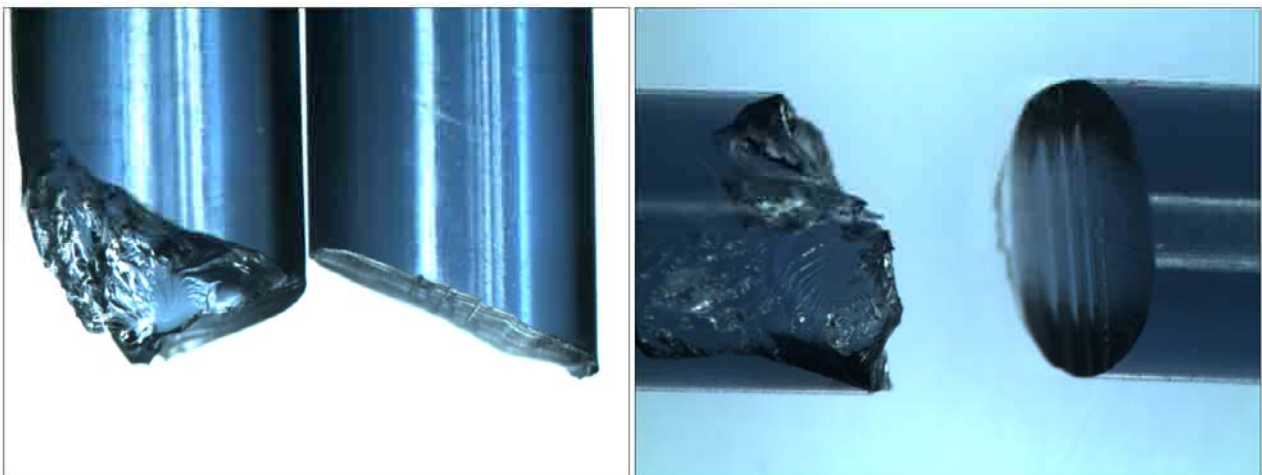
Influence of temperature on disintegration type of injection moulding waste: parts of samples after cutting in -40°C. -samples on the left with frayed cutting surface- brittle cracking, parts of samples after cutting in +20°C -samples on the right with smooth cutting surface
